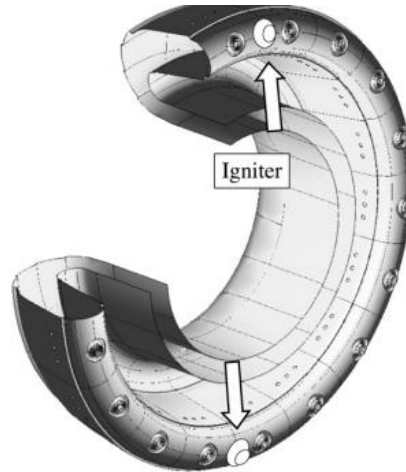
A CAD drawing of the VESTA manufactured by Turbomeca. Two igniters are used to ignite 18 burners. 14 burners are shown. Adapted from [6].
